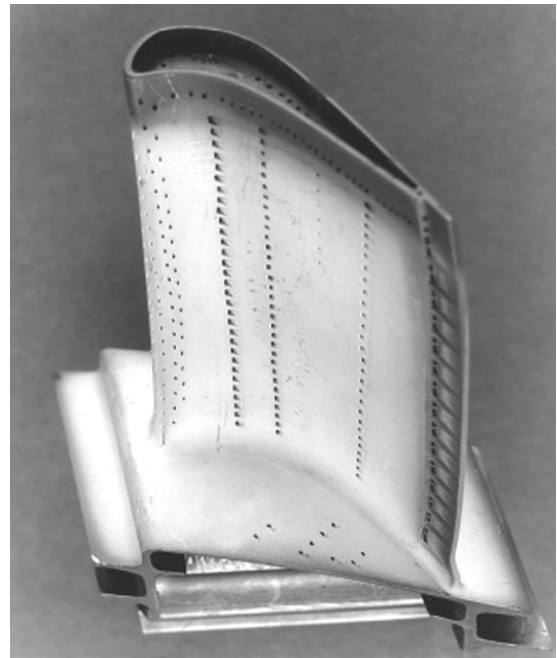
General Electric Aircraft Engines HPT blade with squealer tip.
